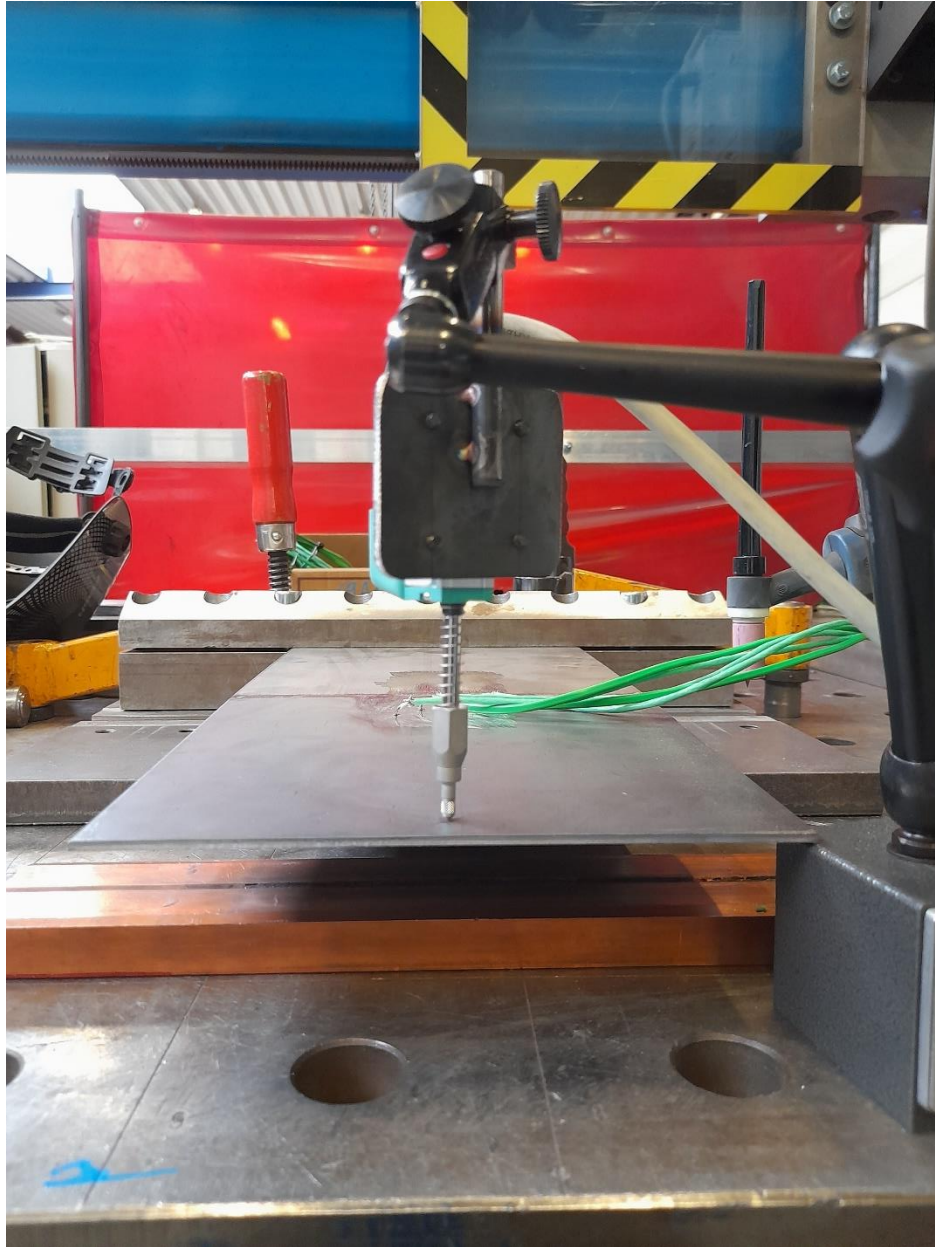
c: Experimental setup seen from the end-of-weld side, the top and the furthest side from the clamp with the thermocouples (green wires), LVDT (metallic part containing a spring)
